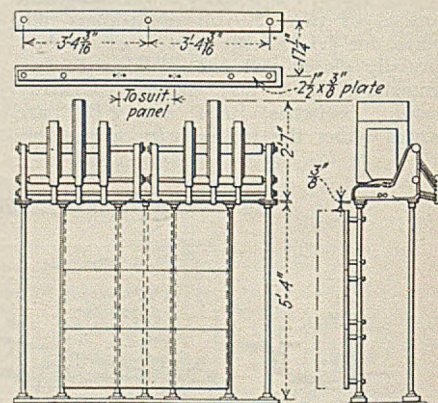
Installation of Primary Reversing Contactors on and Above Secondary Accelerating Panel
